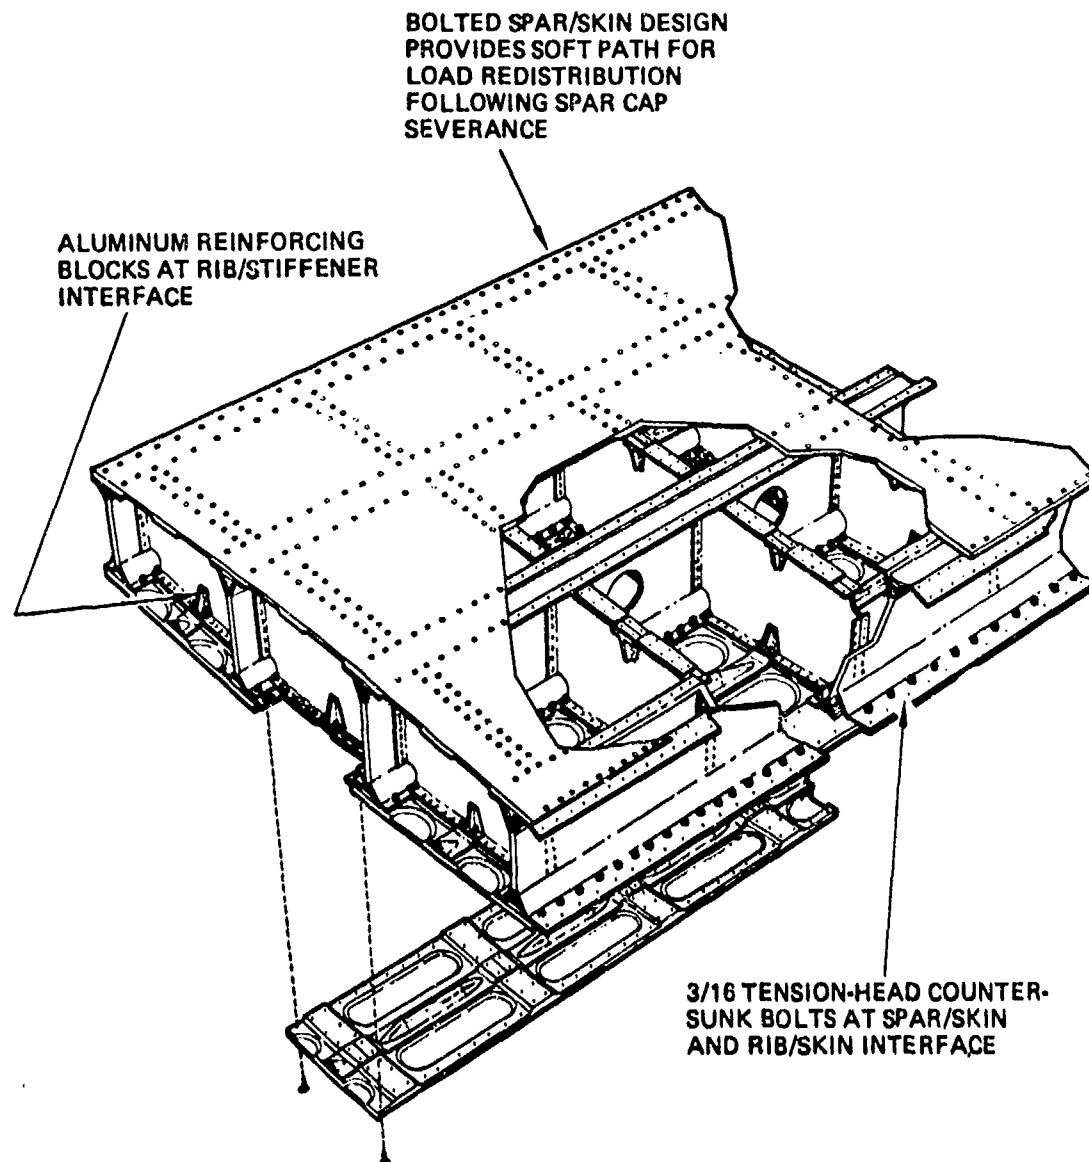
Battle-Damage-Tolerant Wing Final Design—Attachments
